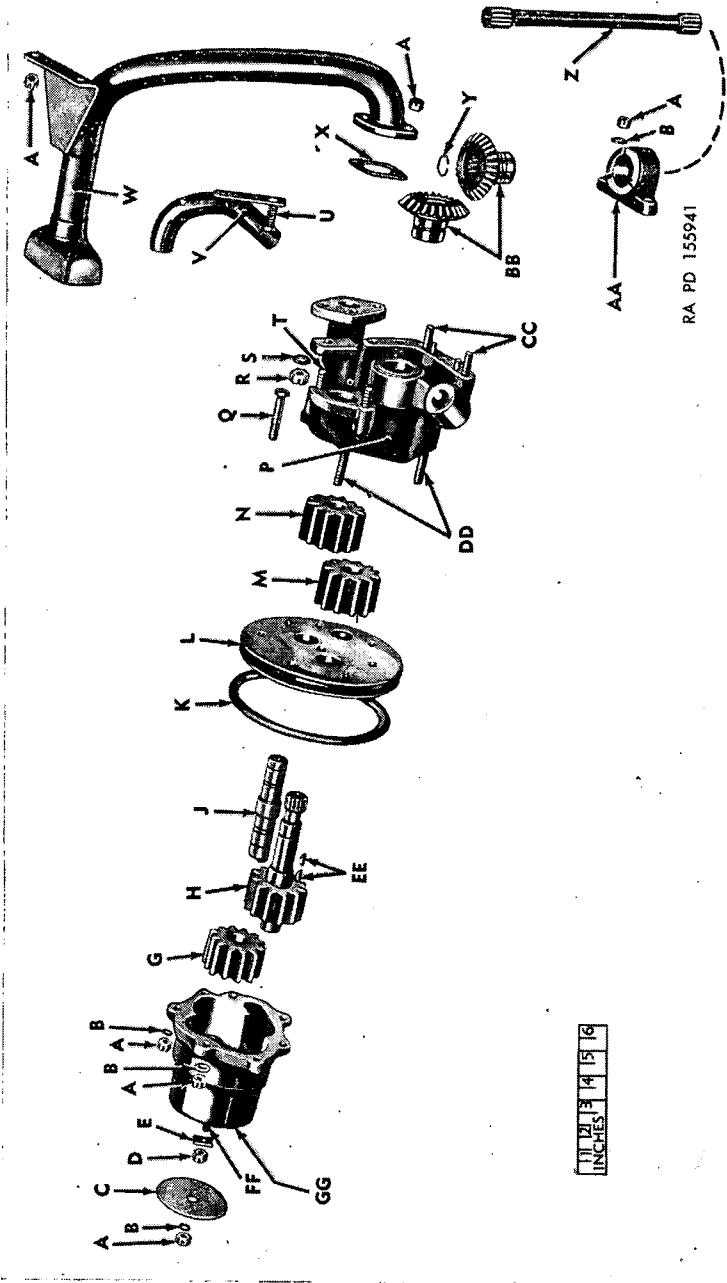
Scavenger and pressure oil pump and lines—exploded view.
